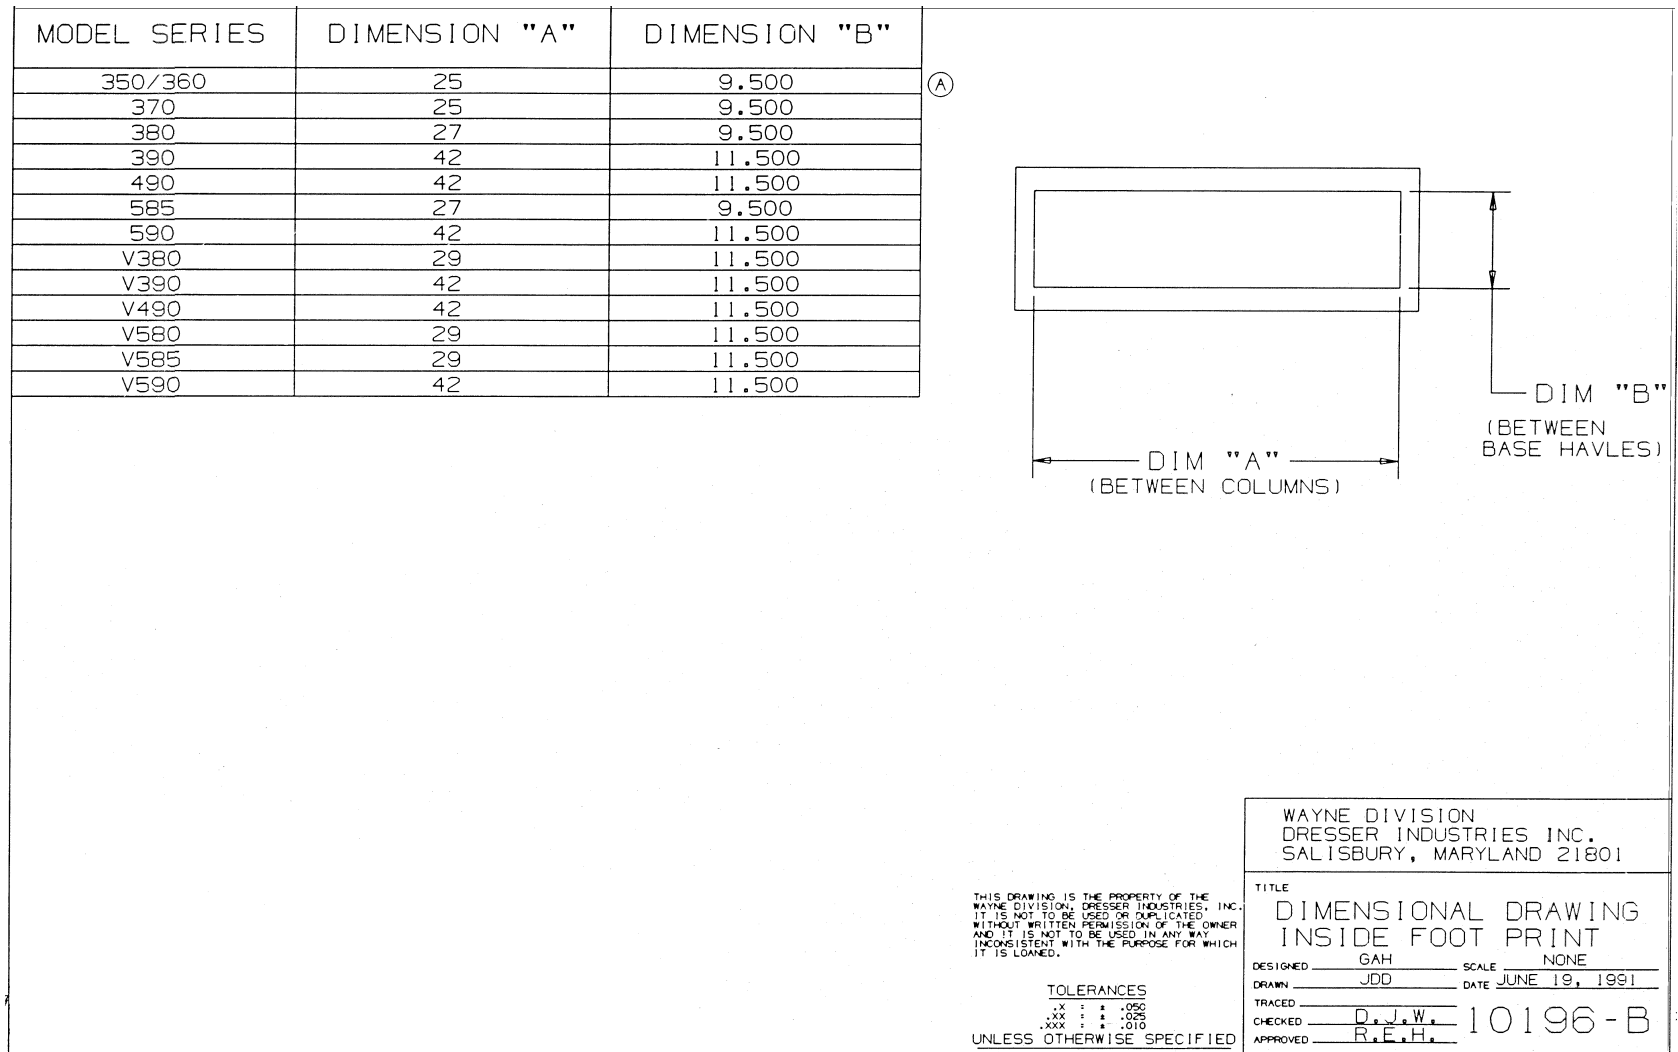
10196-B Dispenser Dimensional Drawing - Inside Footprint
